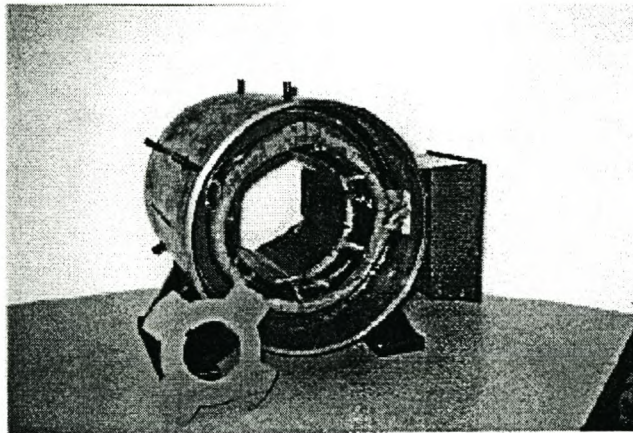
The figure shows stator windings of the prototype machine and a lamination of the rotor in front of the machine
